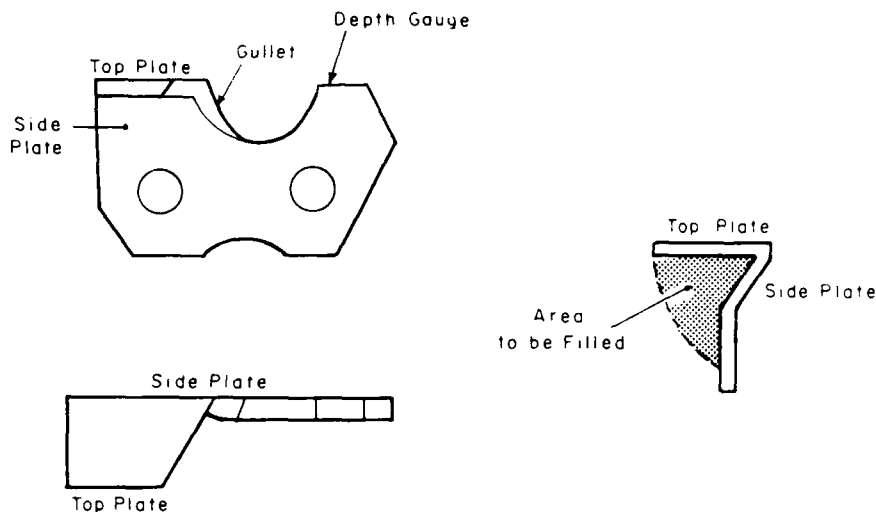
Chain saw cutter. Dashed line indicates area to fill in for improved cutting removal.
